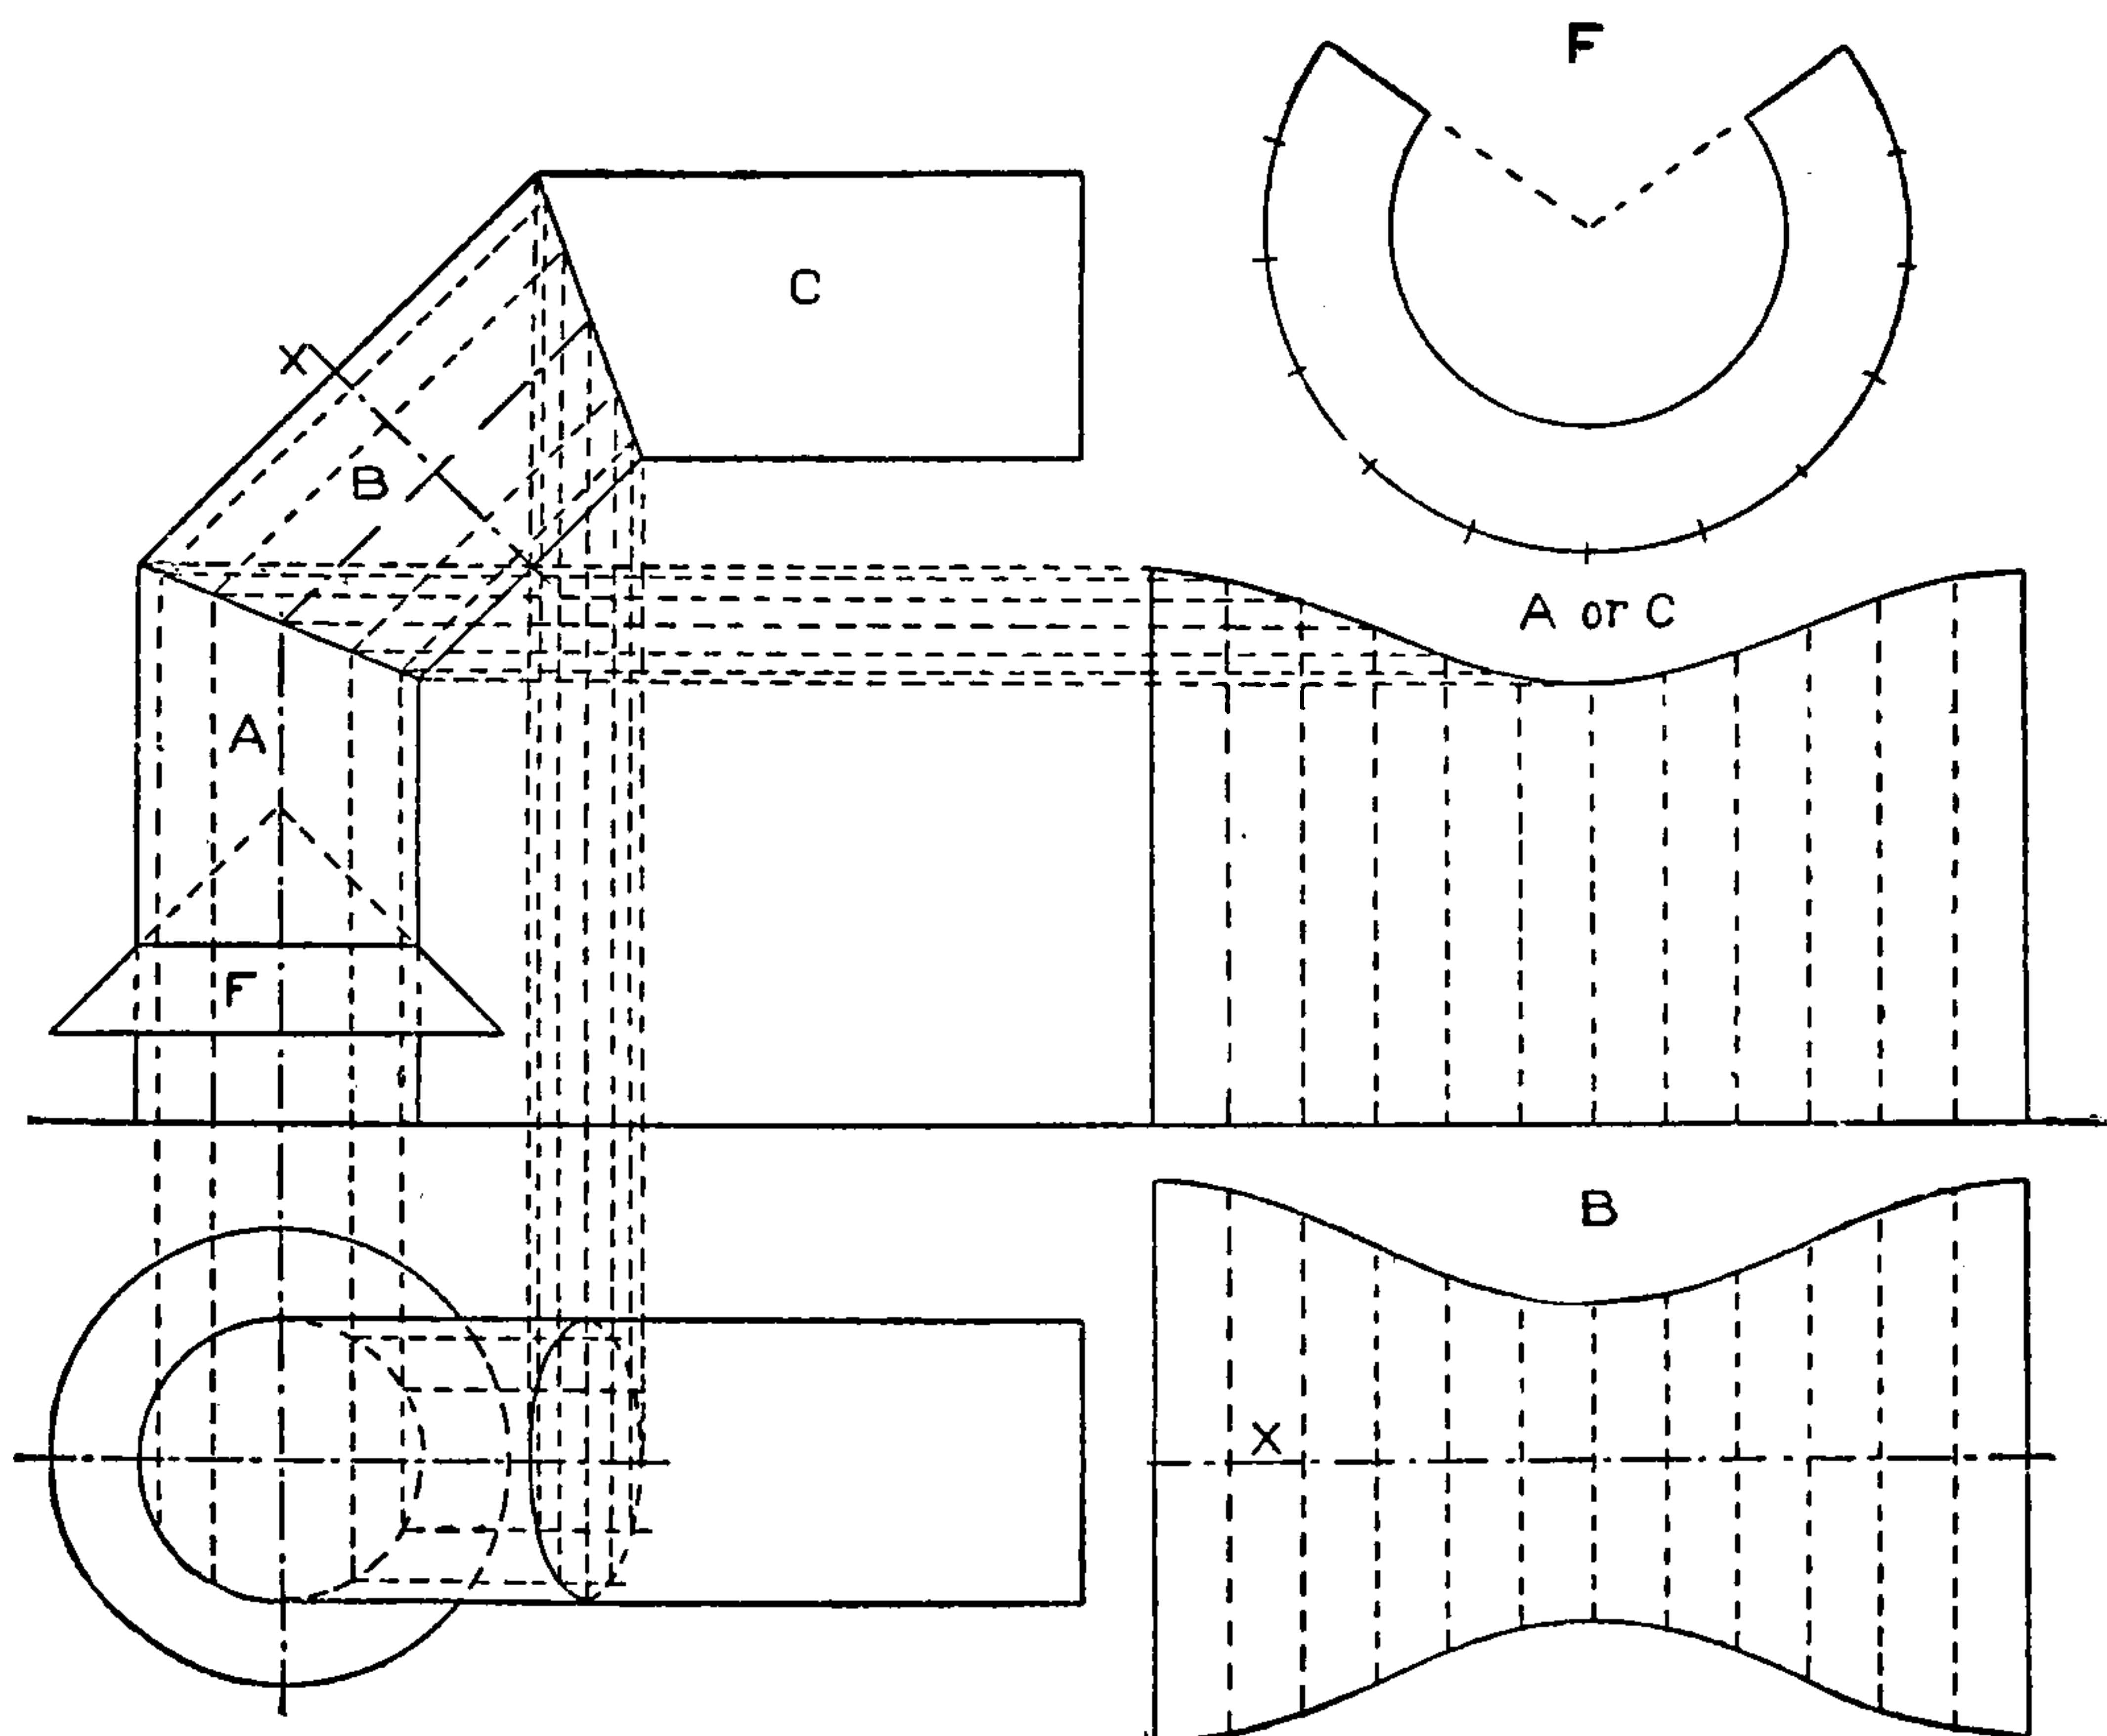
Plan, Elevation, and Development of Three-Piece Elbow and Collar
